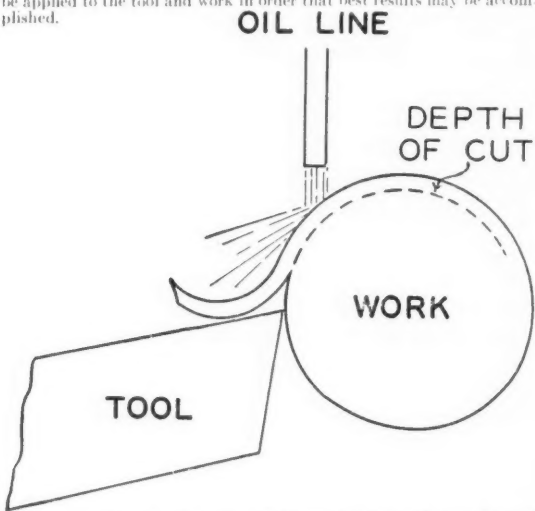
In this view the cutting fluid may be deflected from the work and tool and thereby not be able to perform most effectively.
